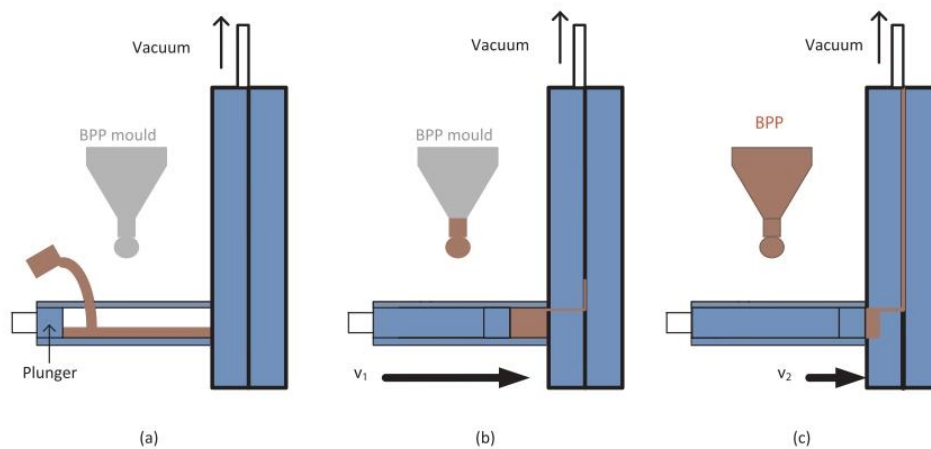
Injection moulding scheme for the BPs manufacturing process: (a) plunger moving at low speed region; (b) casted material filling the mould; and (c) work piece ready.
